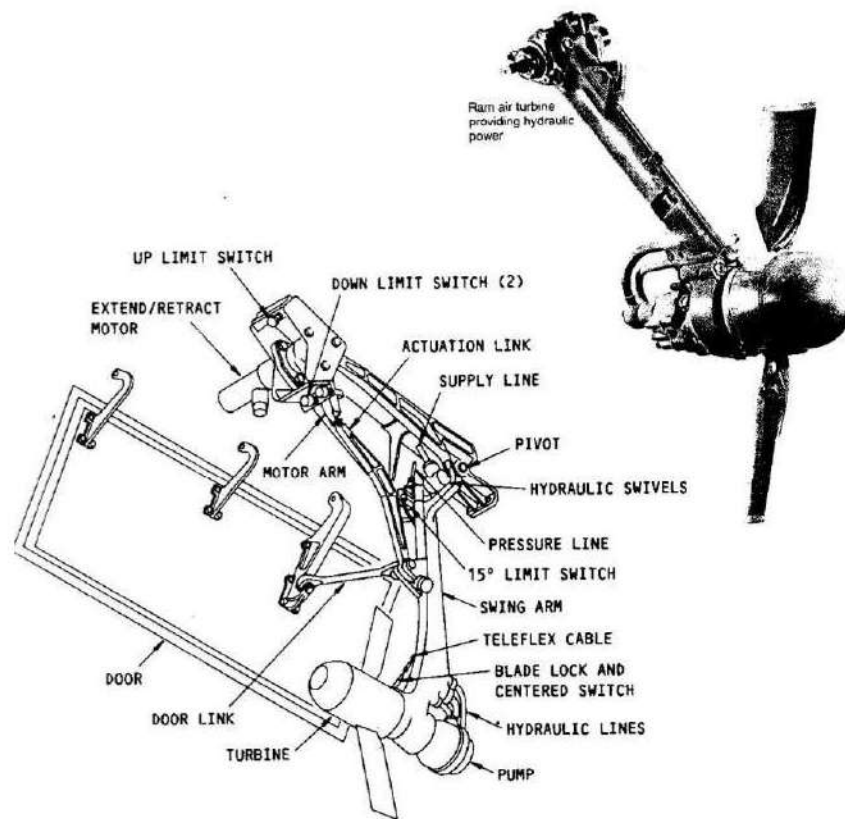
Hydraulic Ram Air Turbine (HYRAT) Pump Unit
